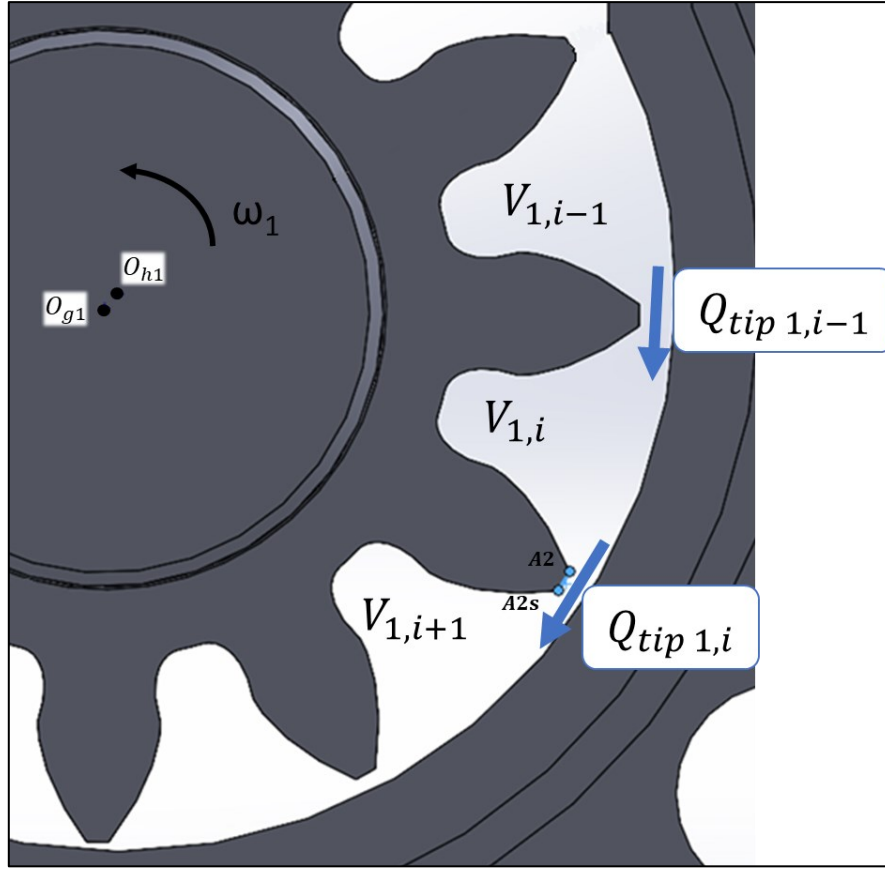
Leakage Through Gear Tooth Tip Clearance
